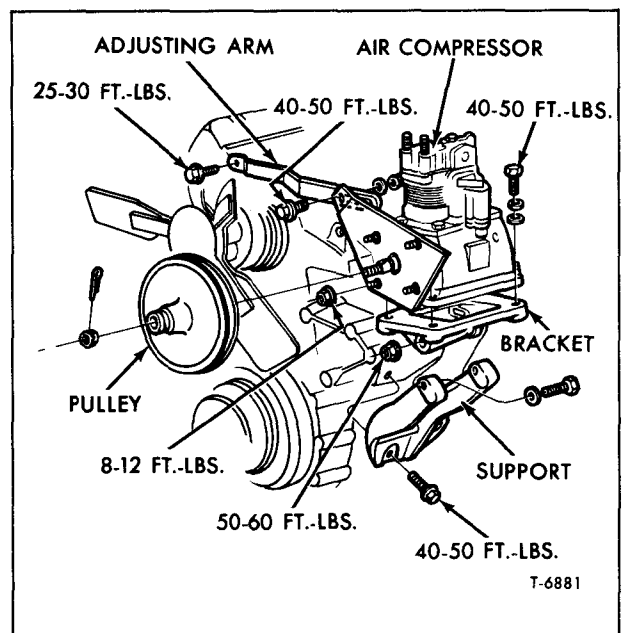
Air Compressor Installation (Belt Driven) (Typical)
